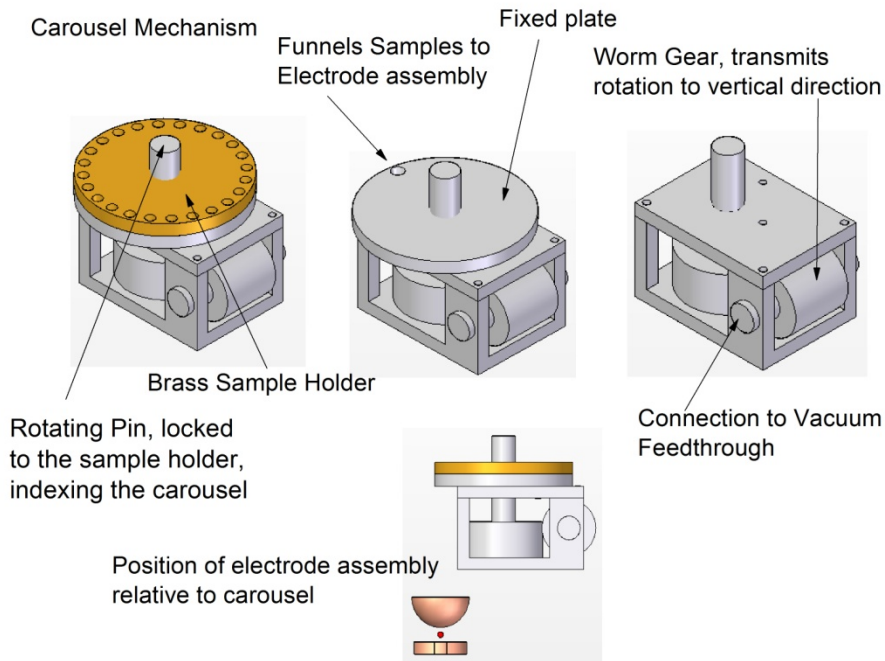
Carousel mechanism in multiple perspectives. The brass disk, indexed to the samples, rotates on top of a fixed plate with a hole that funnels samples down to the electrode assembly. A worm gear mechanism transmits the rotational motion vertically to the brass holder.
